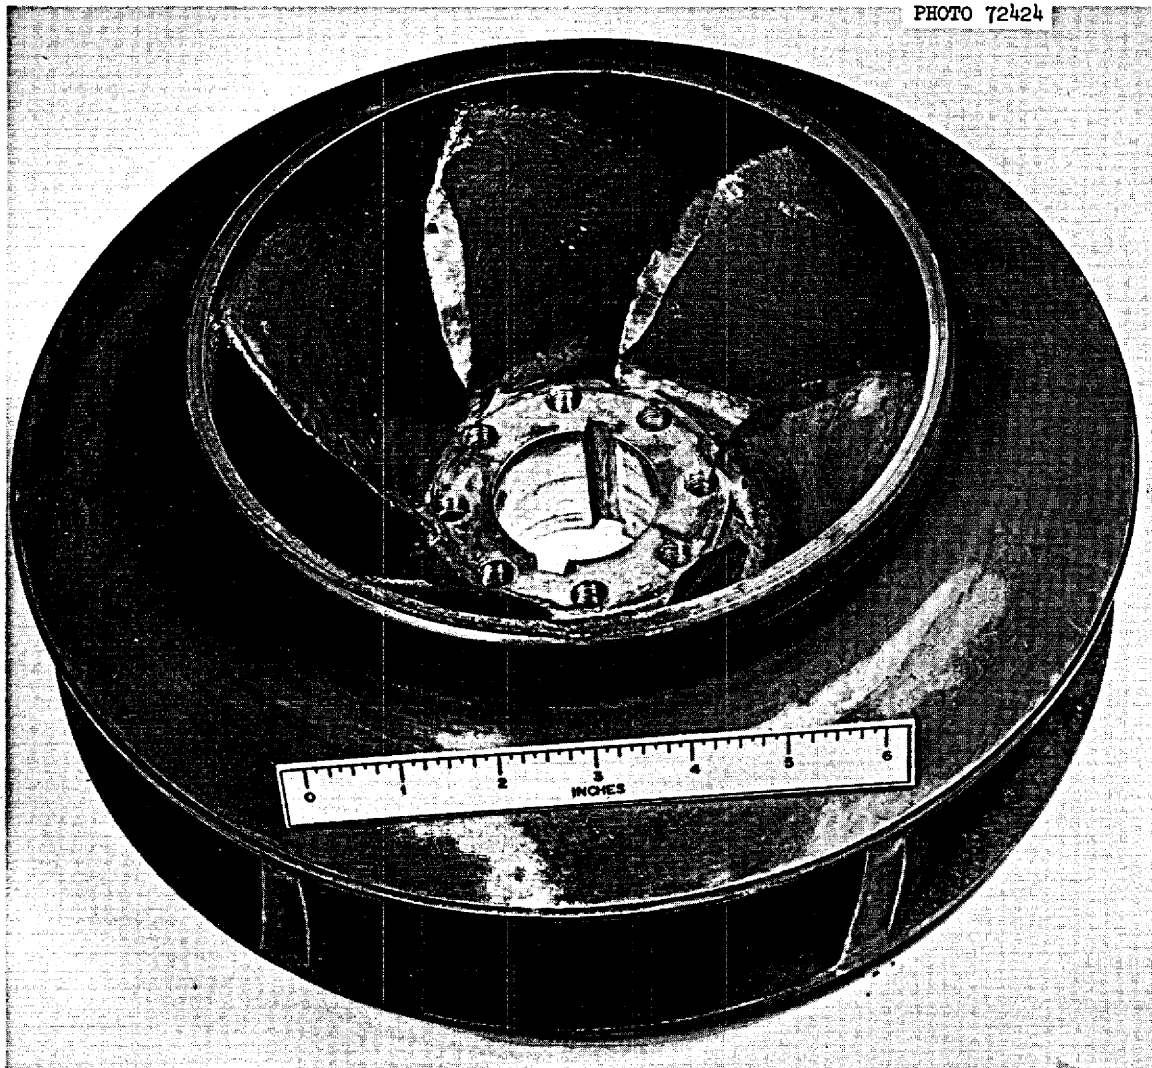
Rubbing Damage to Inlet Edges of Impeller Blades. Damage was caused by rubbing of impeller against detached part of flow straightener that lodged in impeller inlet.
